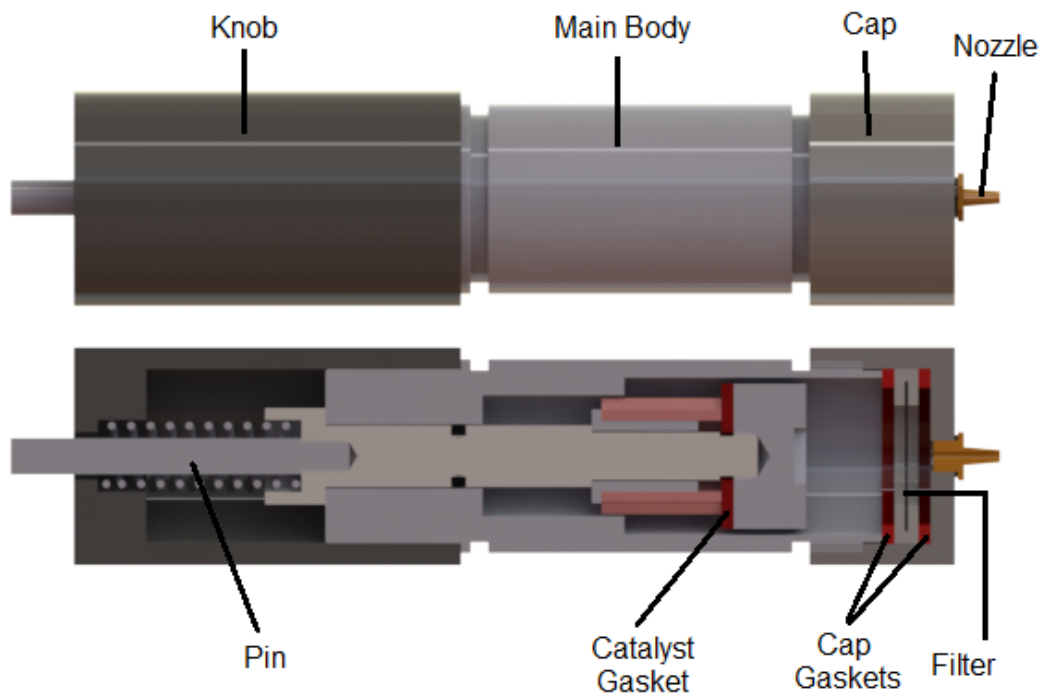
Rendering showing components of the complete pneumatic battery assembly in full and cross sectional views.
